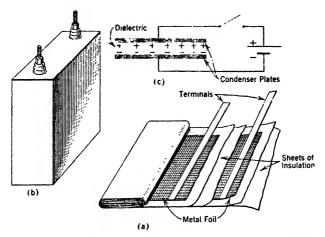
Interior construction (a), assembly view (b), and schematic wiring diagram (c) of a static condenser.
